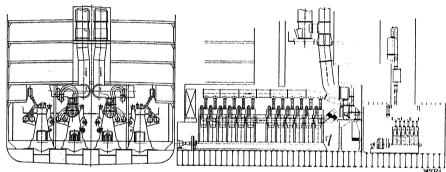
Machinery installation of the motor passenger vessel "Reina del Pacifico".
